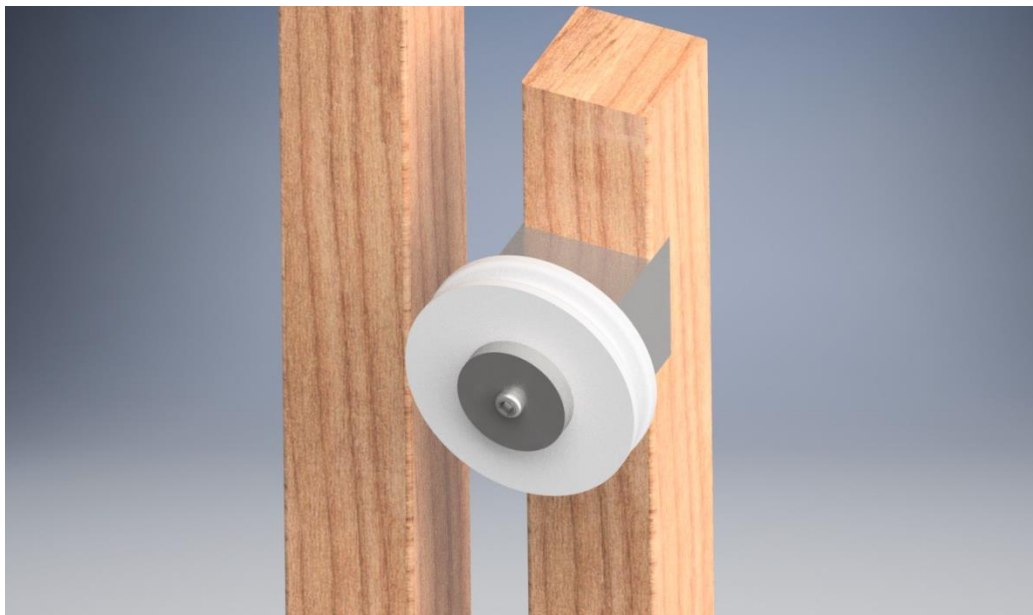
CAD model of custom pulley mounted on a wooden pole.
